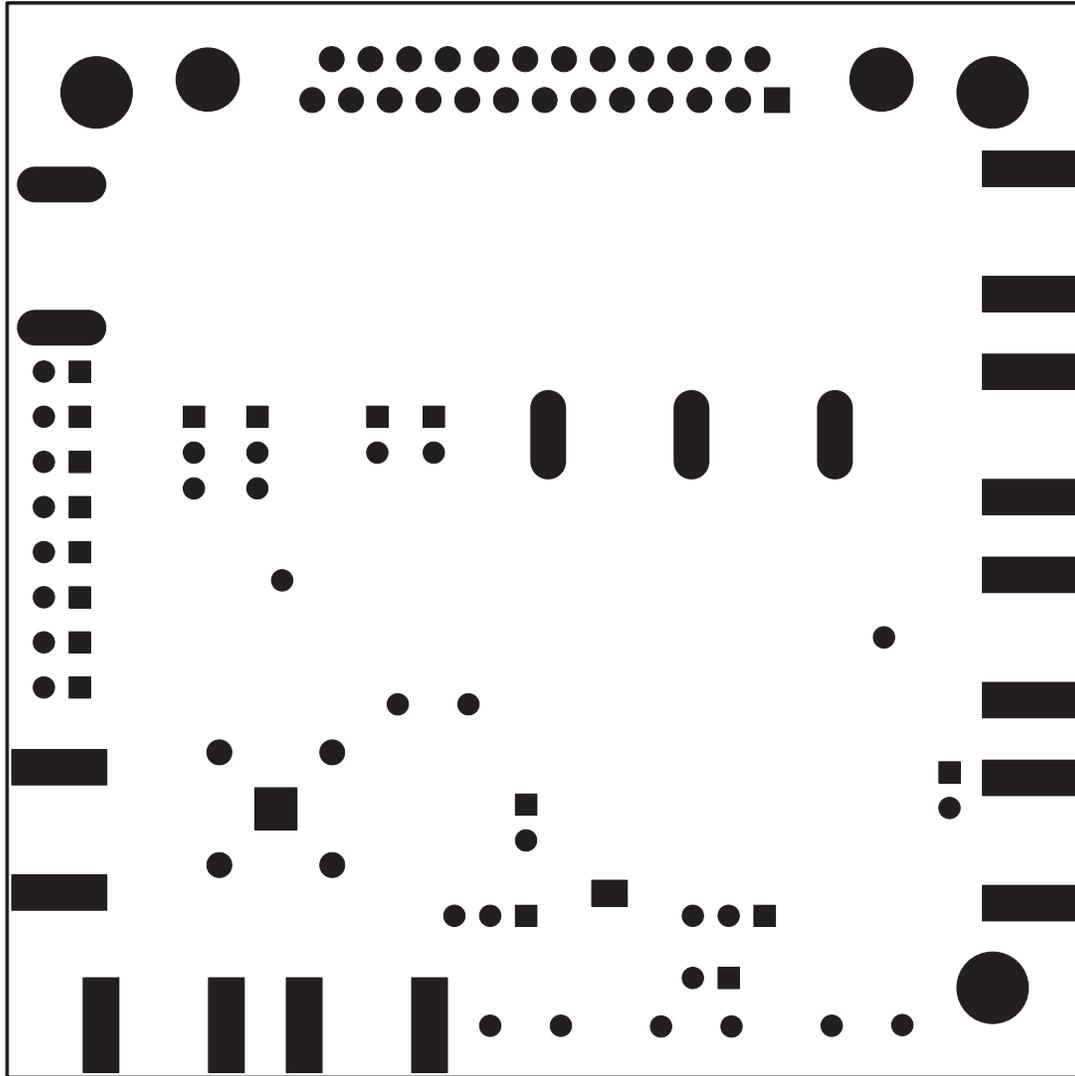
MAX2163 TQFN EV Kit PCB Layout—Bottom Soldermask
